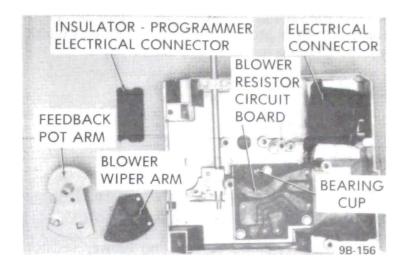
B-212 Blower Wiper Arm and Feedback Pot Arm - Removed
